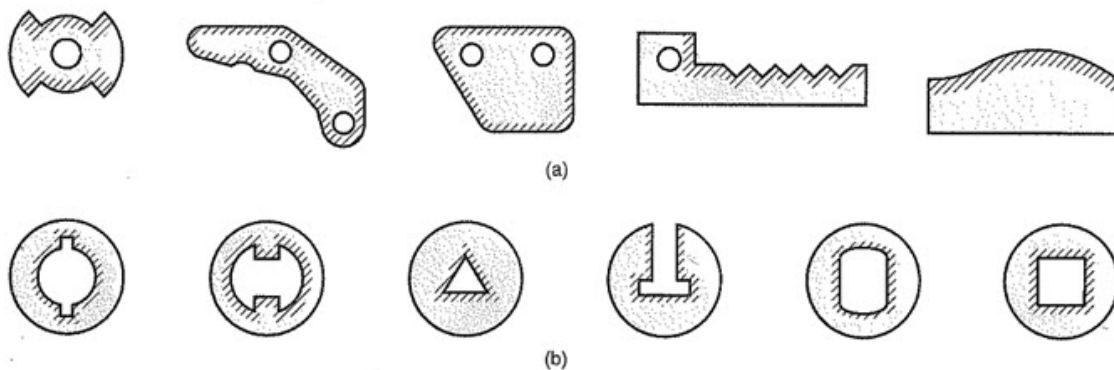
Work shapes that can be cut by: (a) external broaching, and (b) internal broaching. Cross-hatching indicates the surfaces broached.
